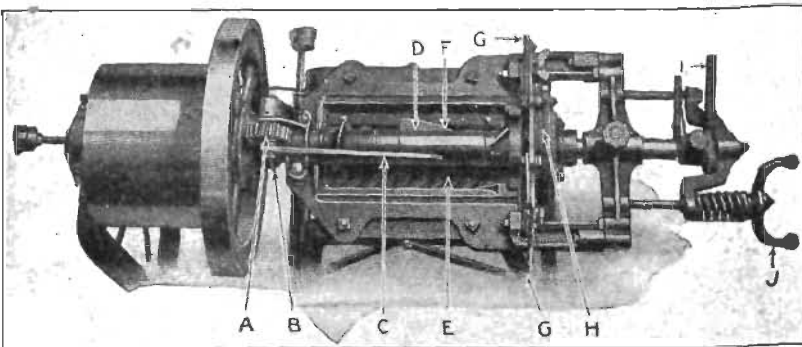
Grinding mechanism of type-B feed grinder: A, agitator driving worm; B, agitator driving gear; C, agitator; D, cob breakers; E, concave; F, cob-cutting knife; G, regulating slides; H, grinding plates; I, release lever; J, plate-adjusting crank.
